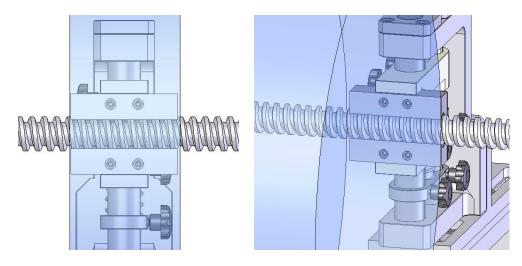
External grinding of a screw with trapezoidal thread with traveling rest for double sided support
